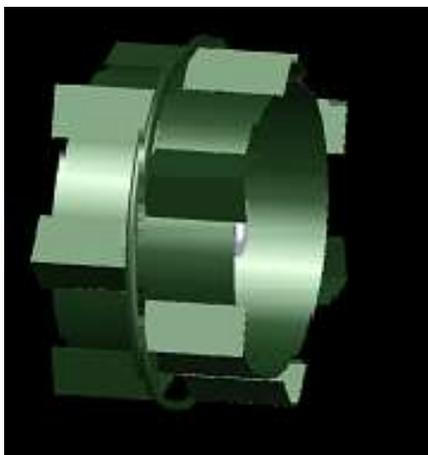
AutoCAD drawing of reaper travelling wheel.
